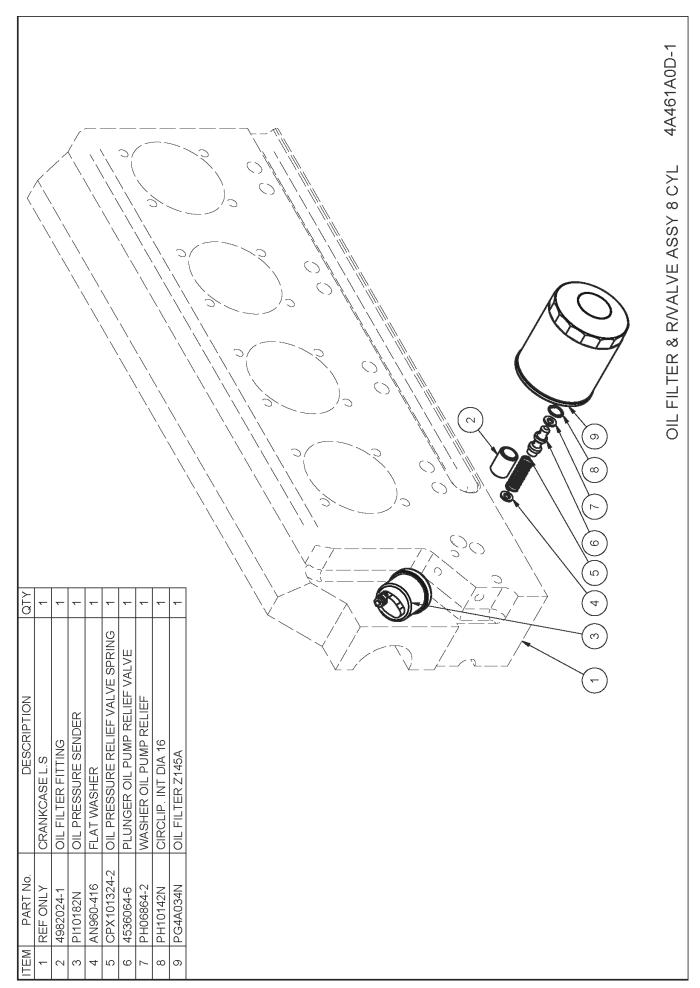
Oil Relief Valve Assembly & Oil Filter
